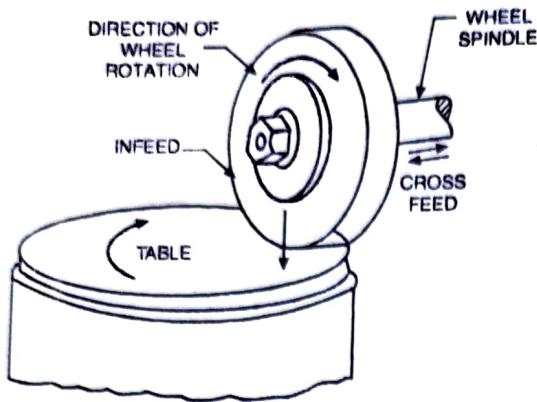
RELATIVE MOVEMENTS OF DIFFERENT PARTS OF A HORIZONTAL SPINDLE ROTARY TABLE SURFACE GRINDER.
